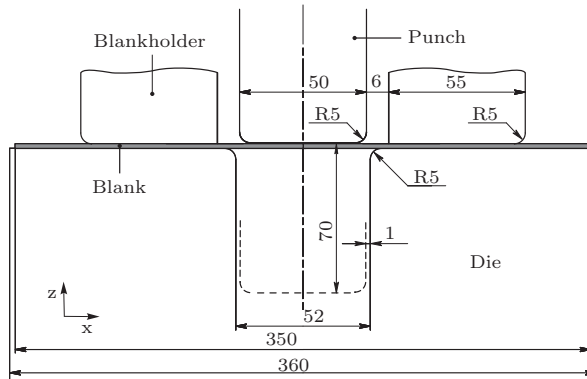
Front view of the draw bending test. All dimensions are in millimeters.
